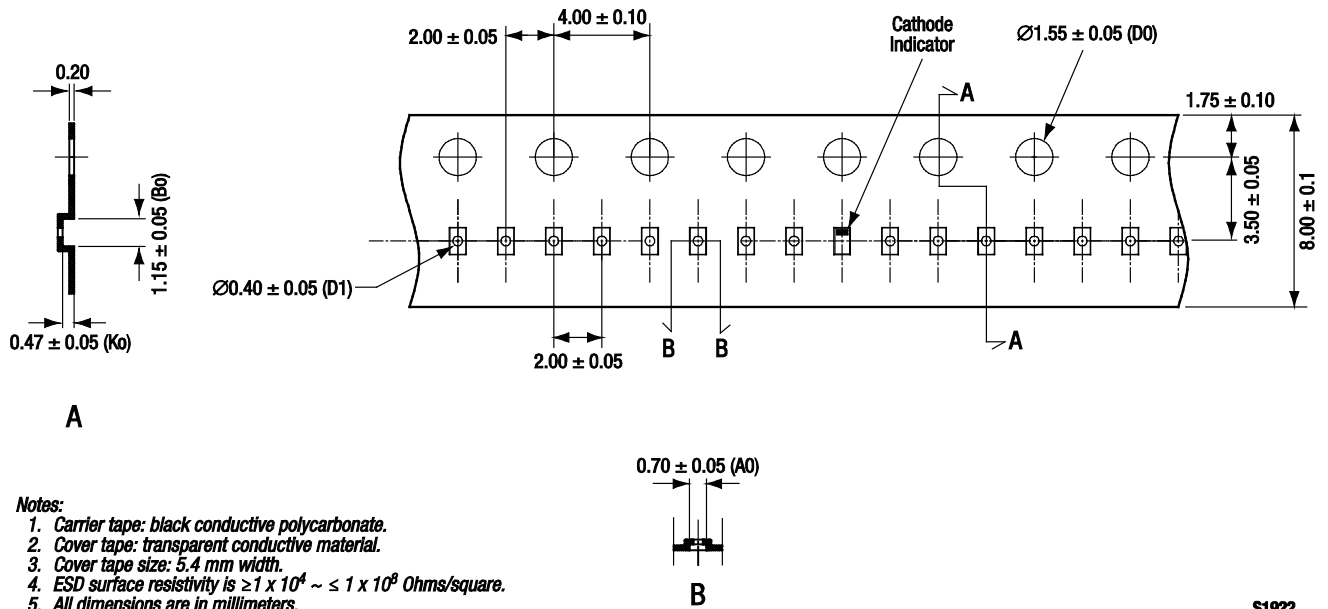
SMS7630-040LF Tape and Reel Dimensions
